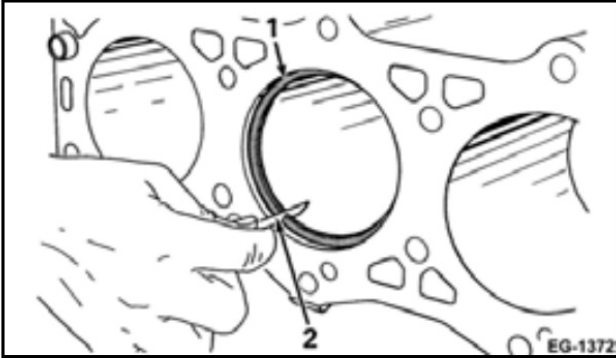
Checking the Piston Ring End Clearance in the Cylinder Bore
